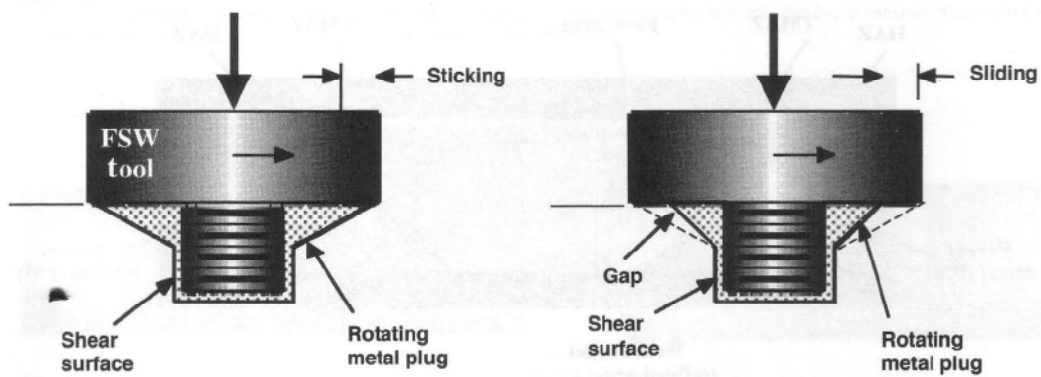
Alternating boundary conditions at the interface of the weld tool shoulder and the workpiece affect the boundary conditions for heat generation [34]
